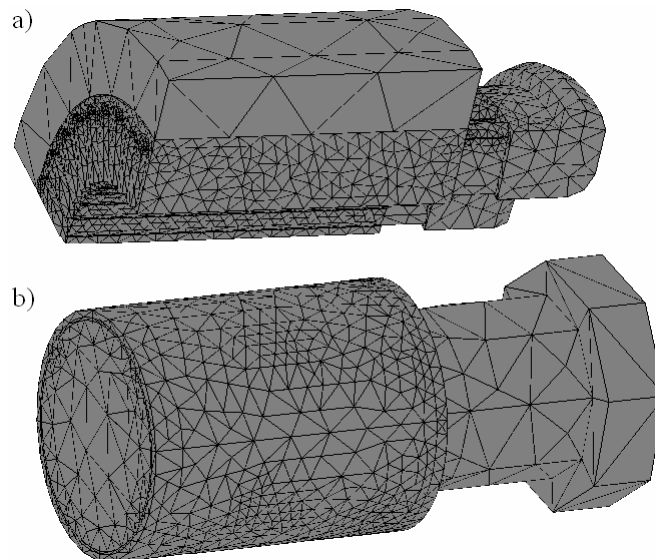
Finite-element meshes of the 3D geometry of the machine parts: a) stator, b) rotor.
